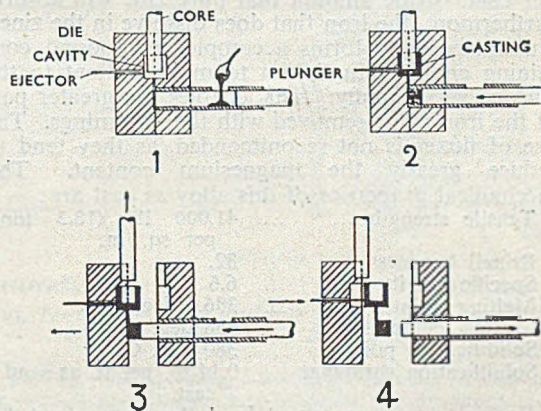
Production Diagram for a Cold-chamber Horizontal-plunger Machine.
